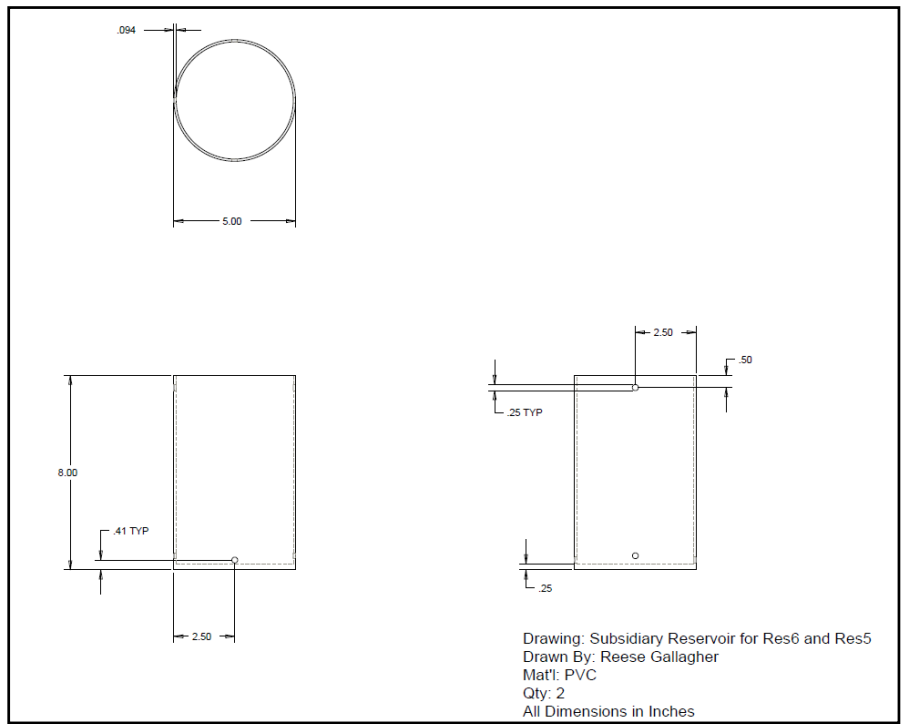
Subsidiary Reservoir for Res5 and Res6 Dimensional Drawing
